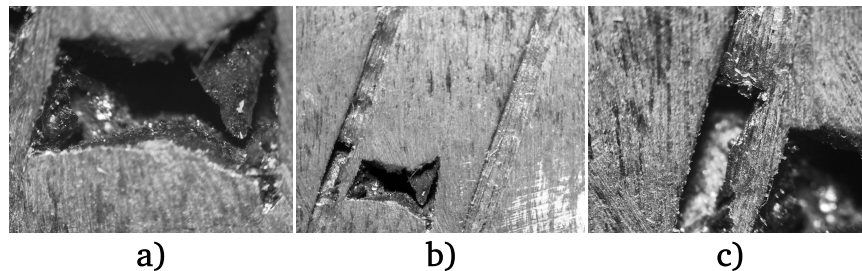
Details observed on a longitudinal cut of the welding zone (sample 3).
